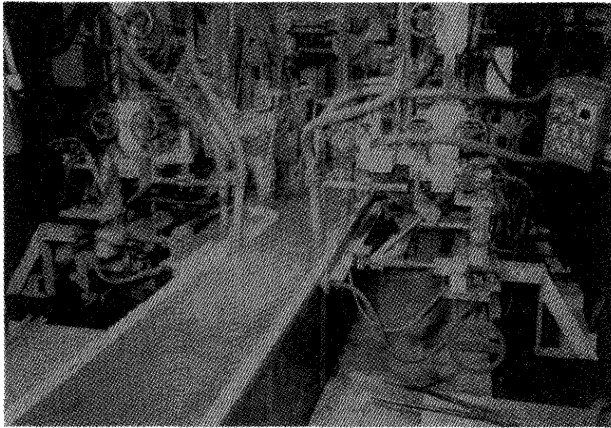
Box corner welding equipment with parallel 3 tandem SAW.
